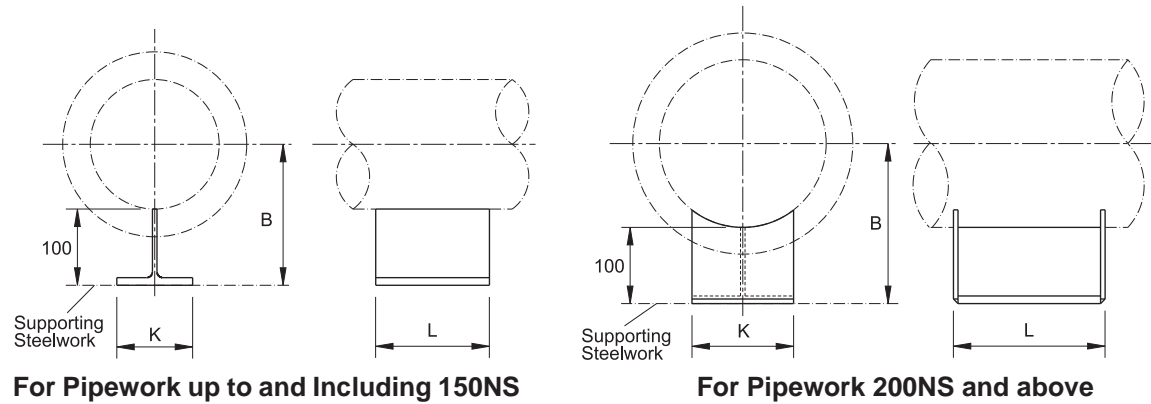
SLIDING GUIDE (WELDED TYPE)
